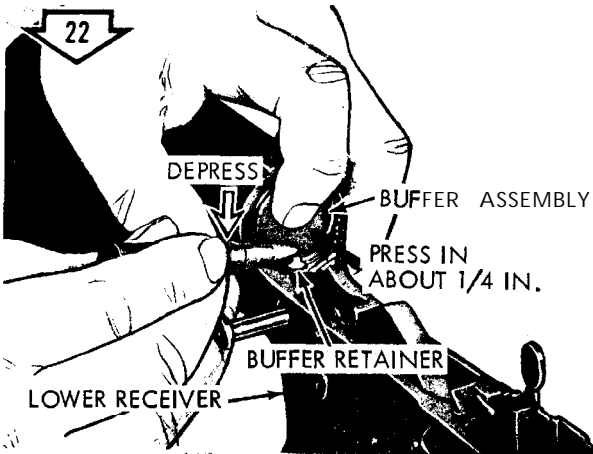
Disassembly/assembly of rifle. (4 of 5)
